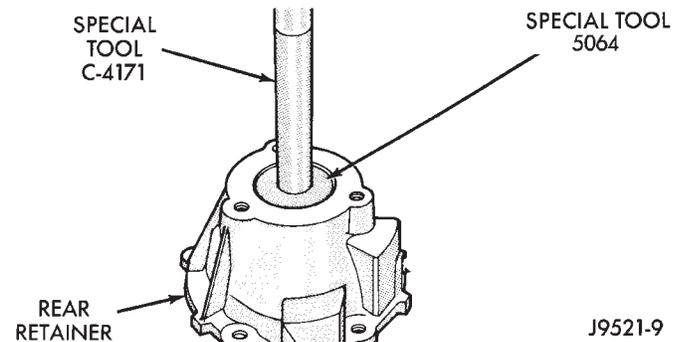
Installing Mainshaft Rear Bearing In Rear Retainer
